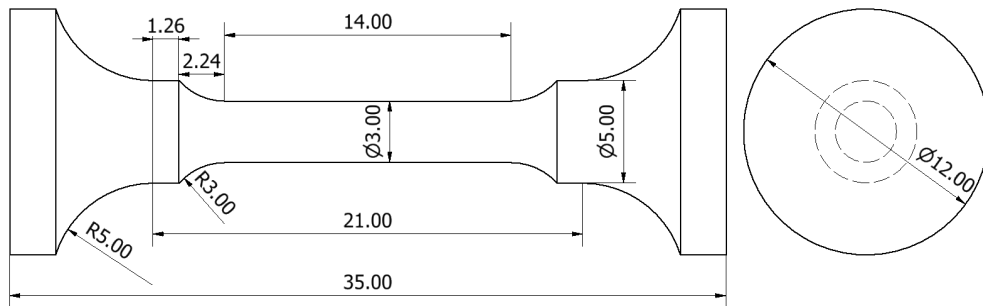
A circular specimen geometry for the tensile testing of Ti5553 alloy. All dimensions are given in millimeters.
